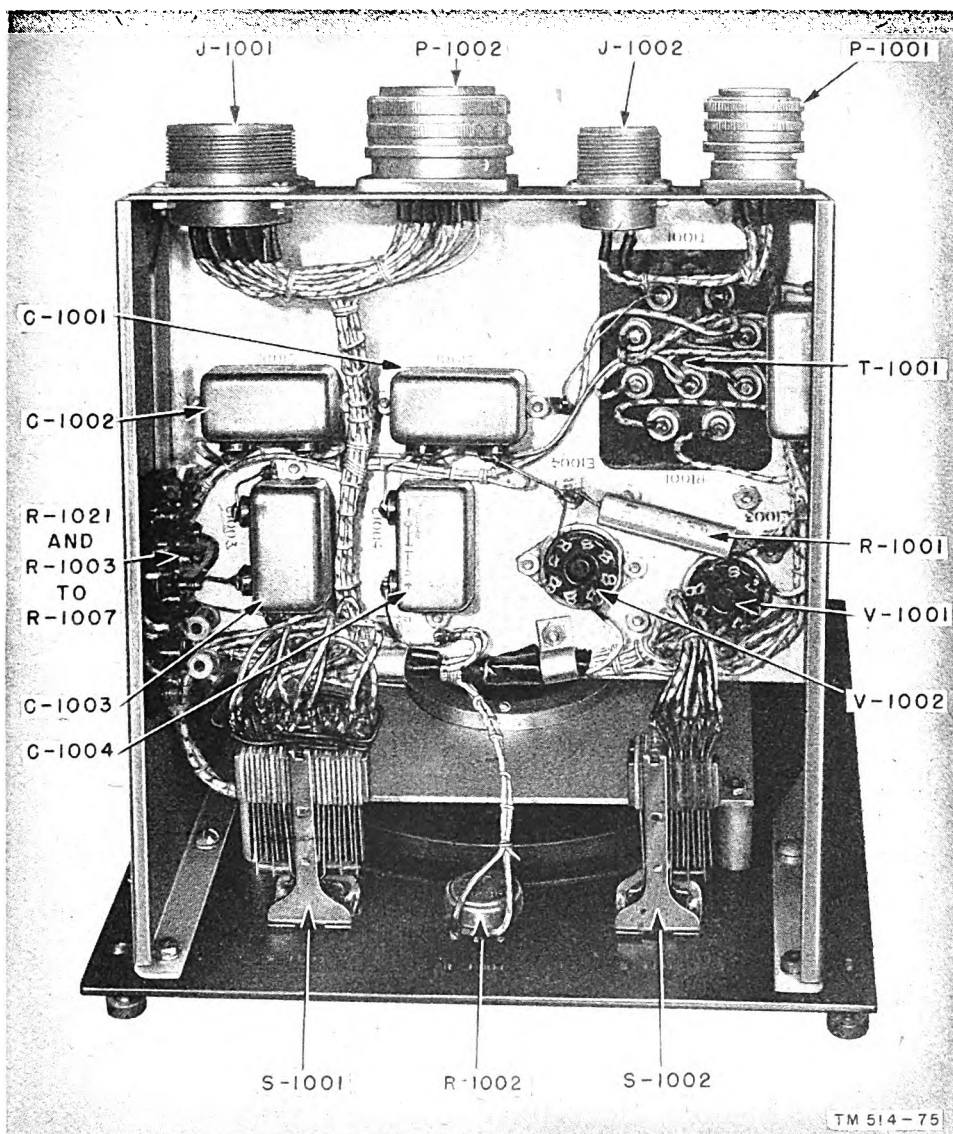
Azimuth Indicator ID-240/CRD-2, bottom view of chassis.
